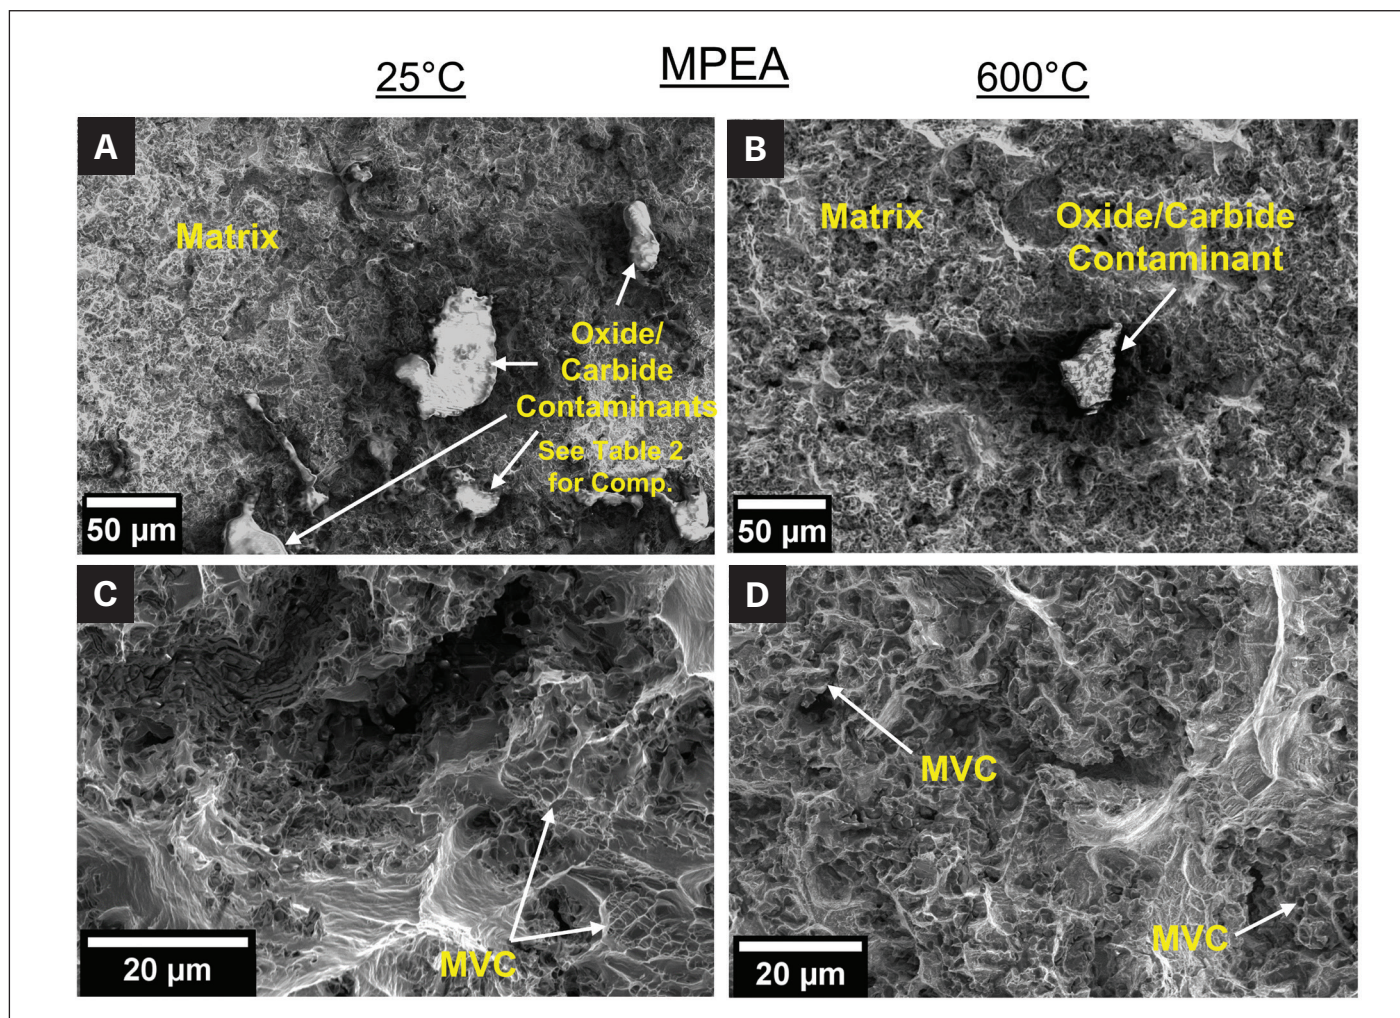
SEM micrographs of fracture surfaces following mechanical testing of the MPEA braze: A, B — Low-magnification images highlighting the presence of dispersed contaminant particles on the fracture surfaces. C, D — higher-magnification images displaying ductile MVC. A, C — room temperature tests; B, D — 600°C tests.
